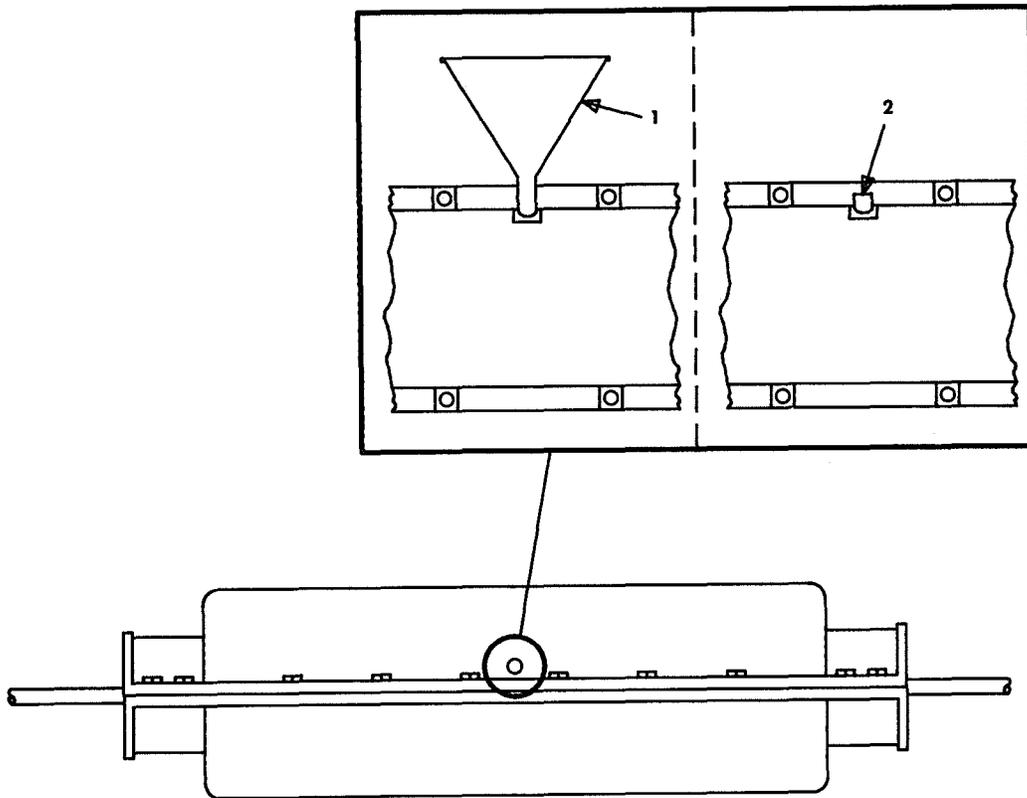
Filling 51D3-LG2 Closure With D Encapsulant
